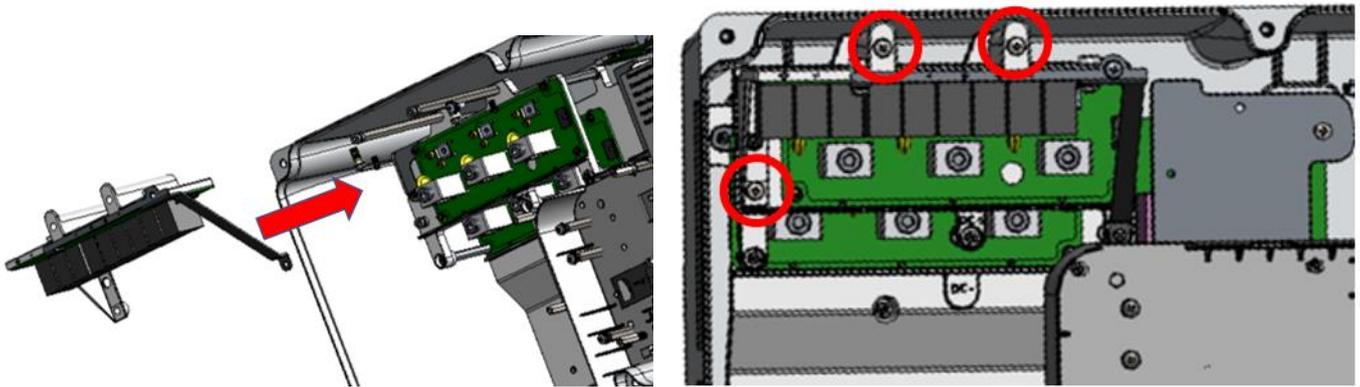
replace GND Bus Bar assembly tighten three M4 screws
